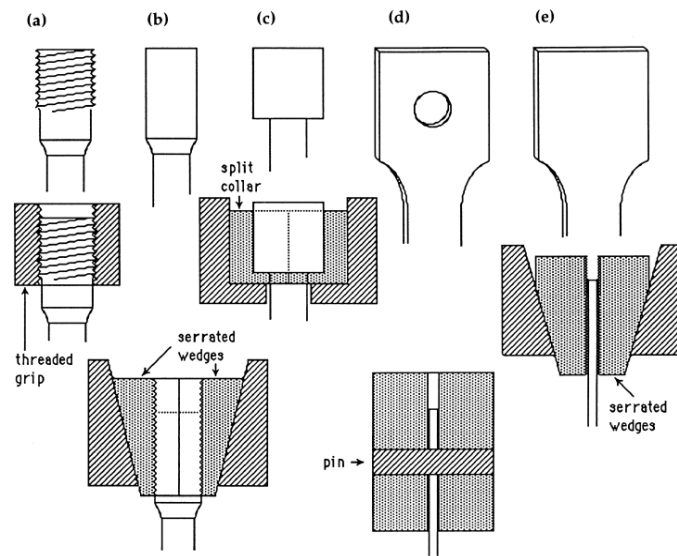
Systems for gripping tensile specimens. For cylindrical specimens; a) threaded grips, b) serrated wedges, c) and, for butt end specimens; c) split collars constrained by a solid collar. For planar specimens; d) pins, e) serrated wedges. Reprinted from [11].
